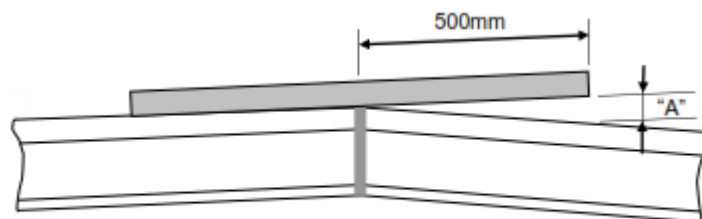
Weld misalignment tolerance in vertical plane (peaking)
